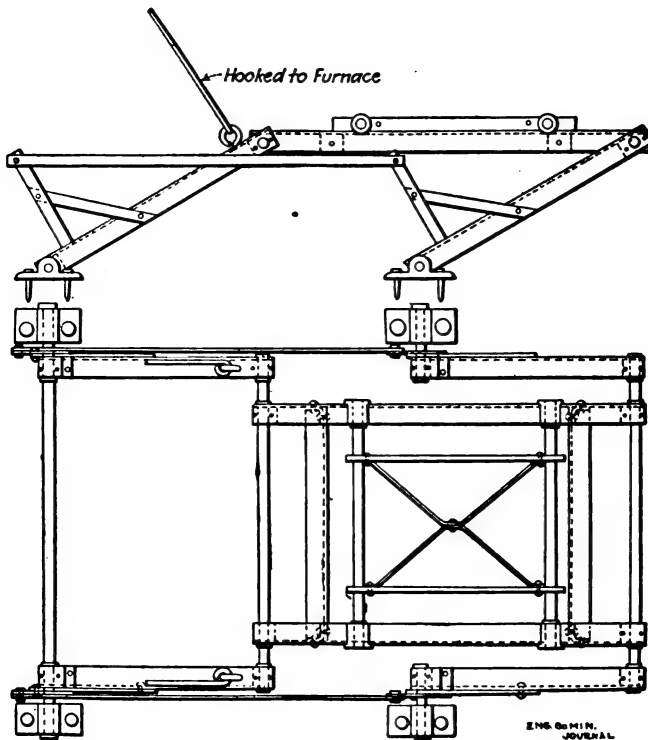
MOVABLE MOLD PLATFORM FOR TILTING FURNACES.
